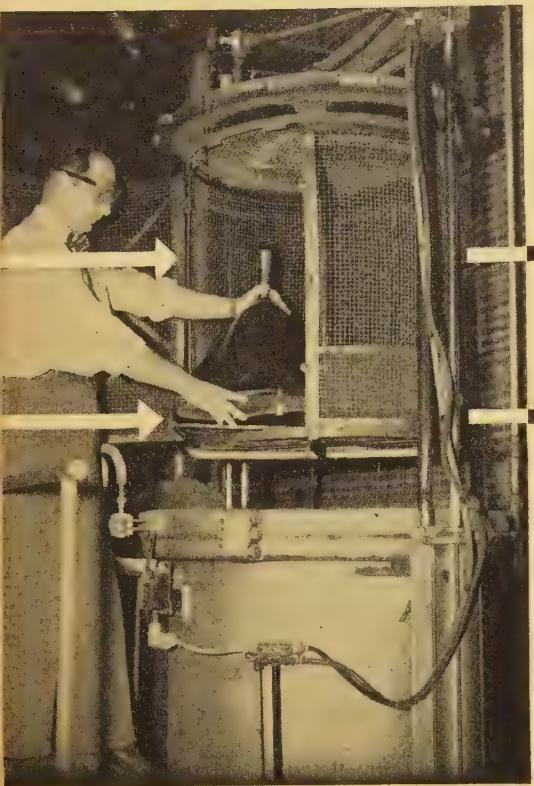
Tube is placed in cage before being lowered into water pressure tank.
